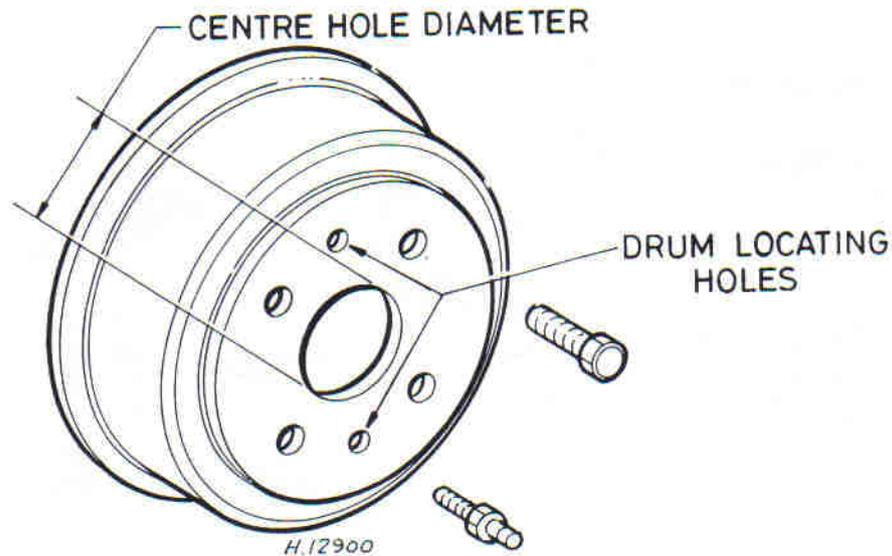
Brake drum and hub diameter measurement (Sec 9)
